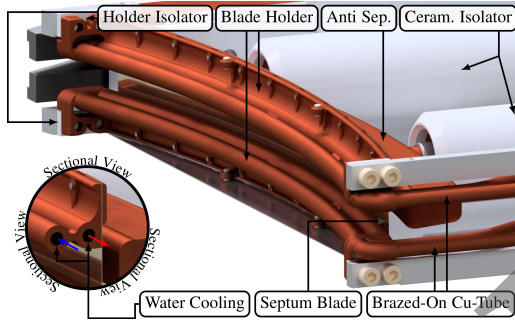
CAD rendering of the extraction septum with an updated blade holder design and sectional view of its integrated water cooling channel.
